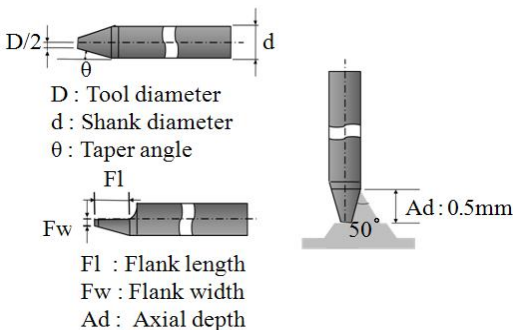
Geometry shape and flank wear width of micro end-mill used in FED machining process
